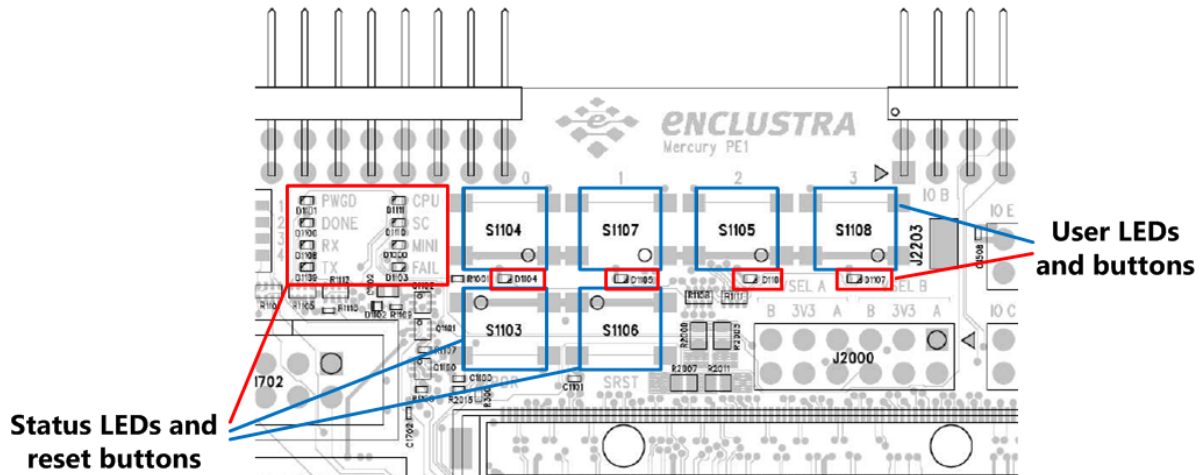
LEDs and Buttons - Assembly Drawing Top View
